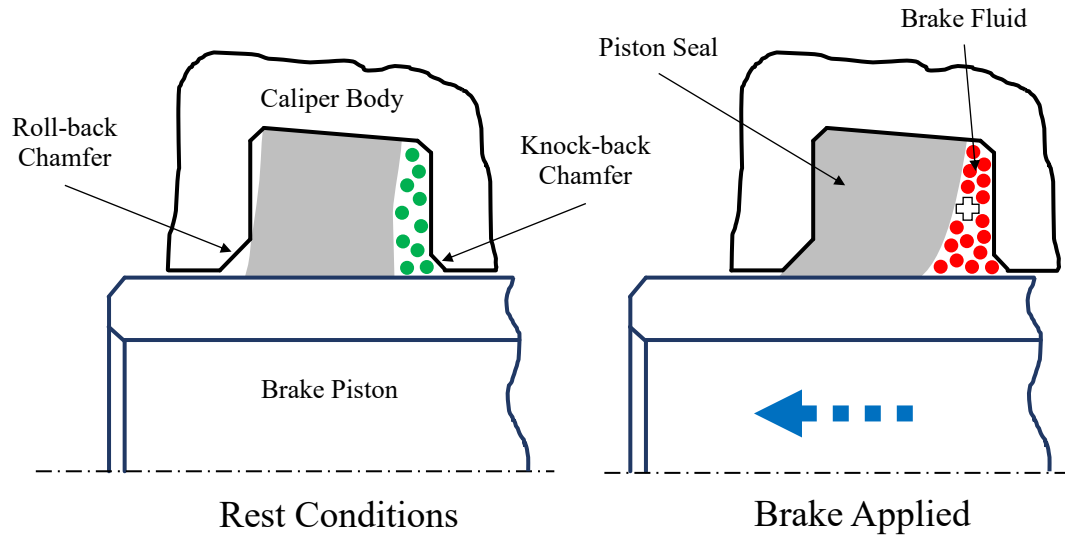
Schematic representation the piston seal deformation before (left) and after (right) the piston displacement in the caliper of a disc brake.
